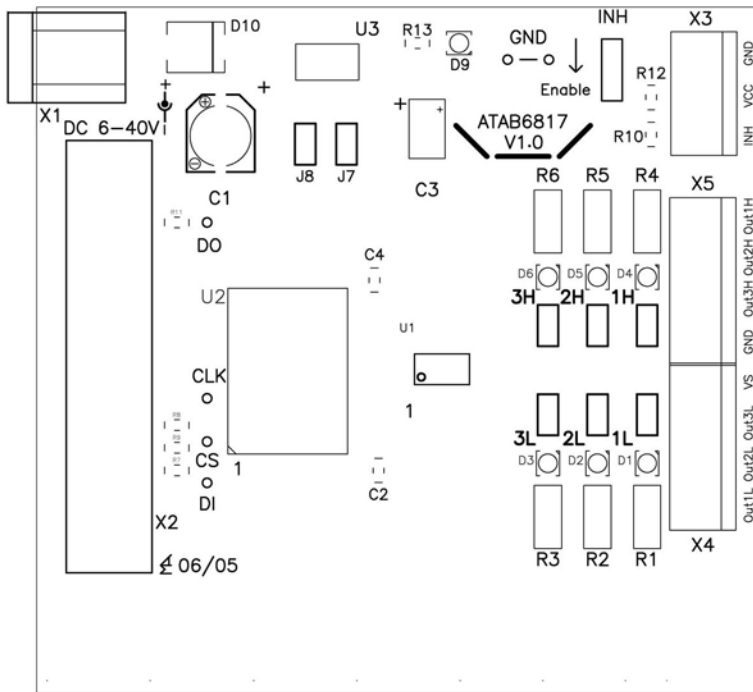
ATAB6817 Basic Application Board Top Side, Top View
